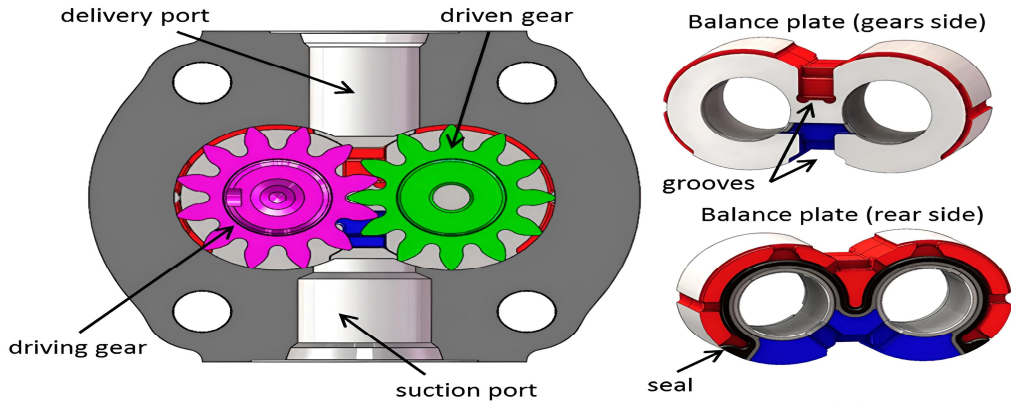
Pressure On Top Of Spur Gear Pump Housing
